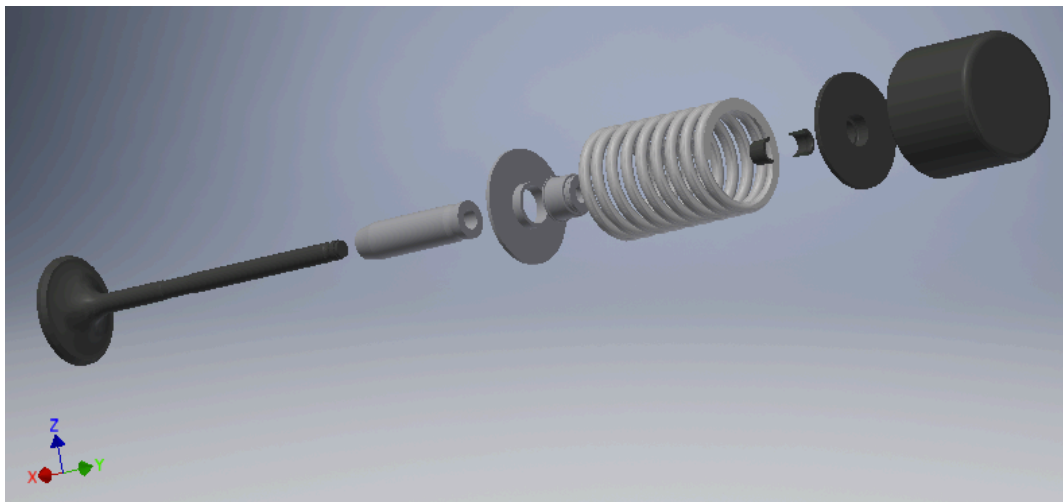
Bucket tappet valve train – exploded view - designed in Autodesk Inventor 2016.
